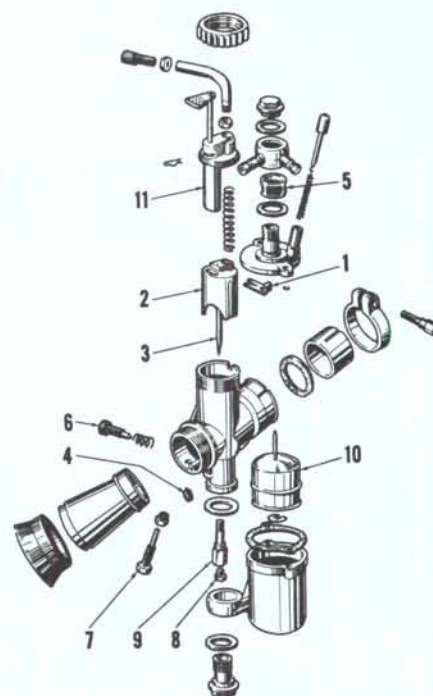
Exploded view of Del'Orto carburetor used on Sport and Scrambler models. Type used on ISDT is similar.
